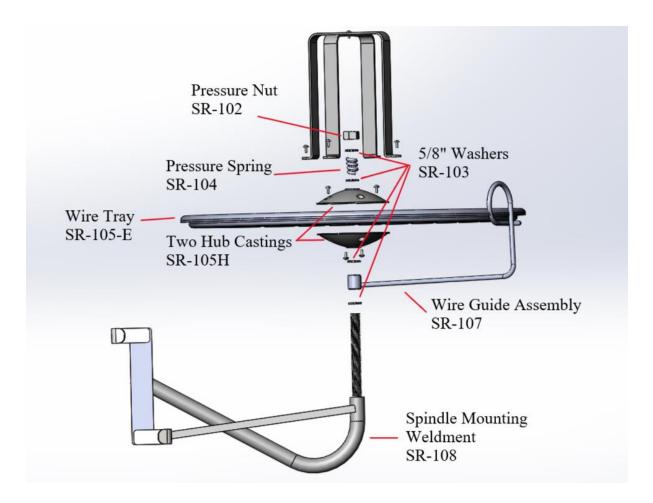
Attaching wire tray to the spindle mounting weldment. The parts are shown in the correct positions on the spindle mounting weldment.
